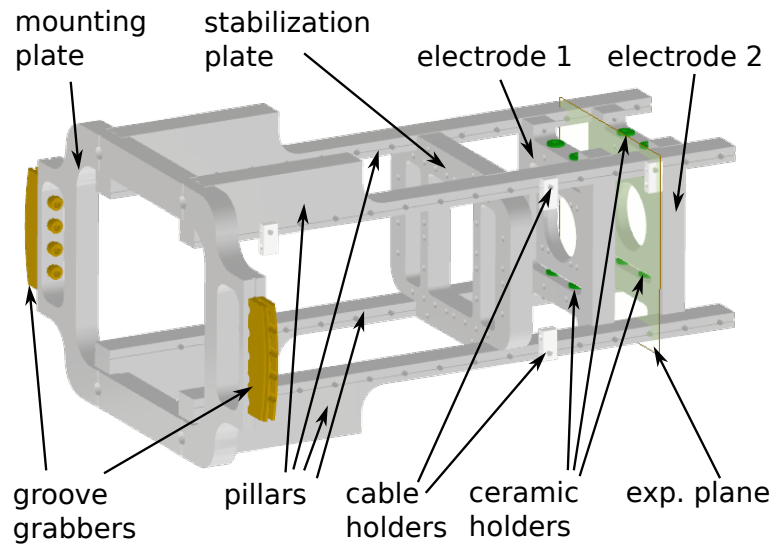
The inner assembly is shown as a CAD sketch. The different parts are labelled.
